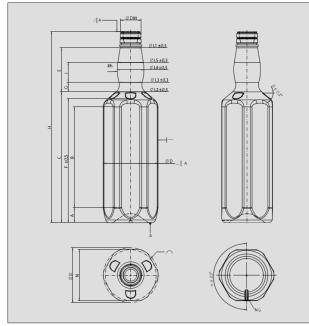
Dimensioned glass bottle (specially-shaped container)
